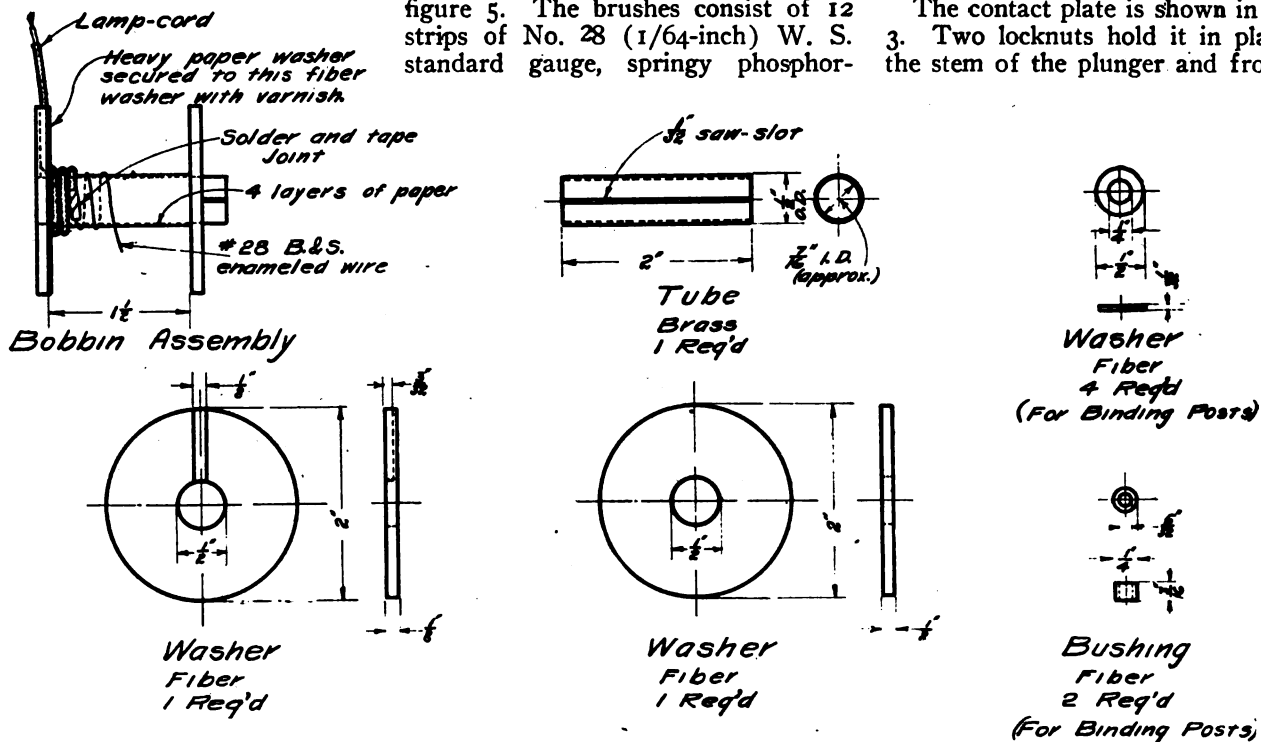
Diagram of the magnet bobbin assembled and in detail.
